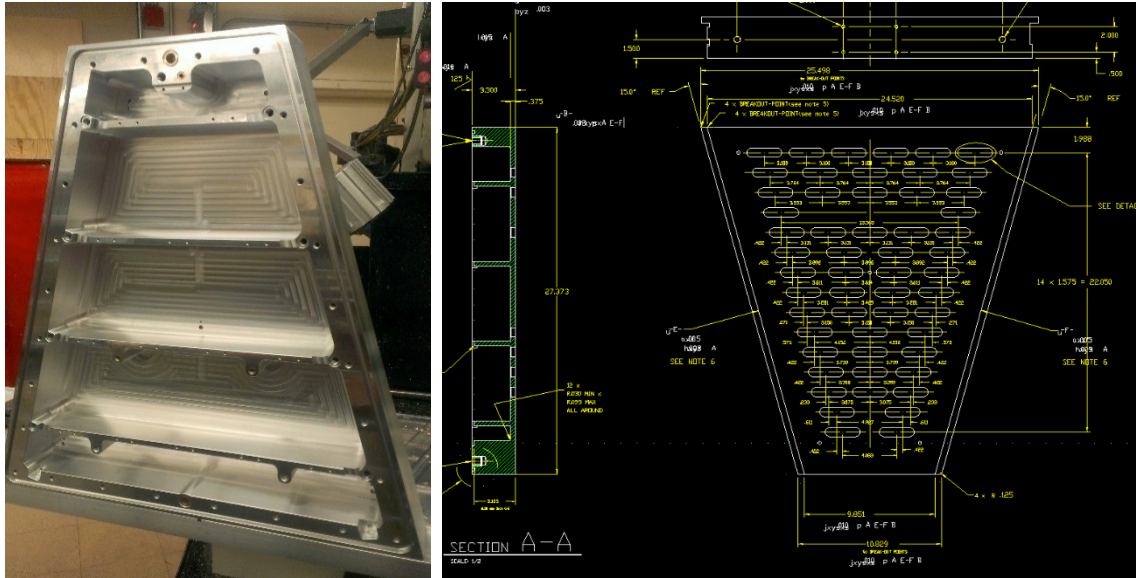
A prototype inner sector strongback is shown during fabrication at the University of Texas (circa 2013). The sector was machined out of a single piece of aluminum. Dimensions are: ~27 inches tall, ~25 inches wide and weight ~70 lbs. The sector is viewed from the backside.
